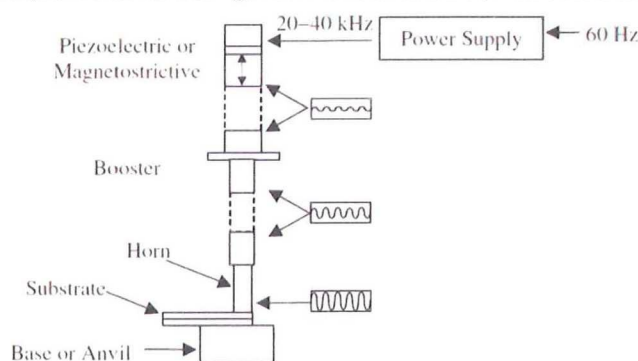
Schematic drawing of ultrasonic welding machine (Yousefpour et al., 2004).
